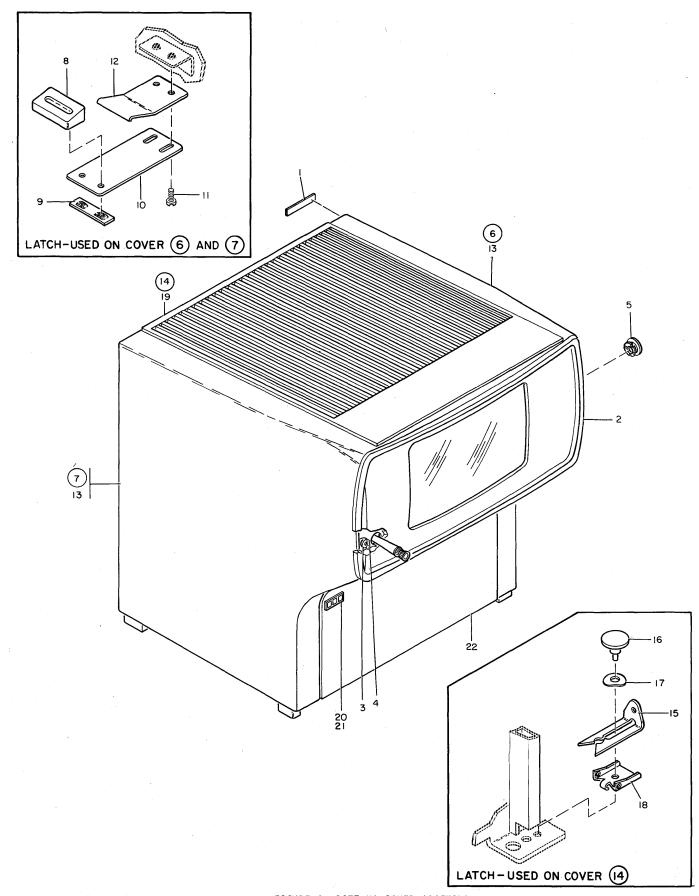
3277 M1 COVER ASSEMBLY.
